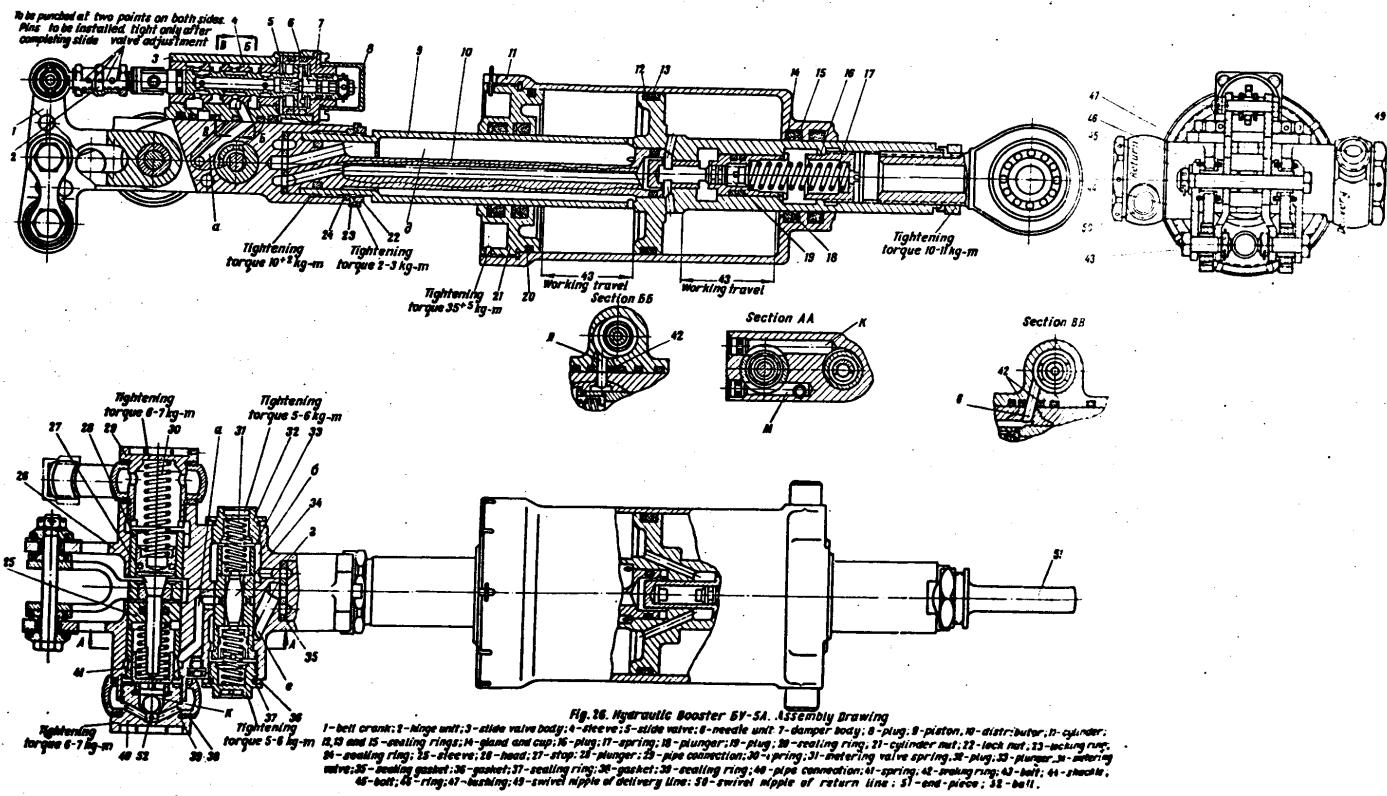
Hydraulic Booster 5Y-5A. Assembly Drawing
